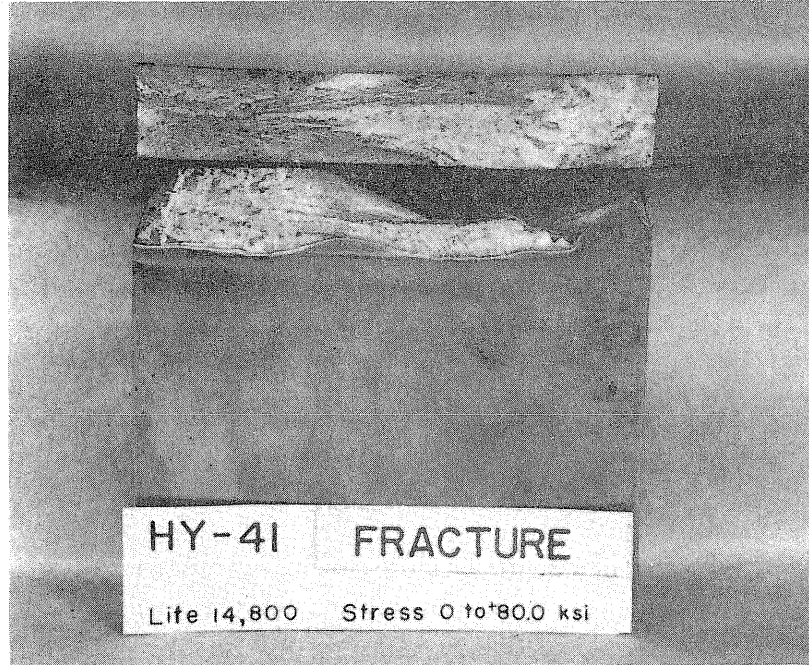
TYPICAL FRACTURES OF TRANSVERSE BUTT WELDS WITH REINFORCEMENT REMOVED. (3/4 IN. HY-100 MATERIAL)
